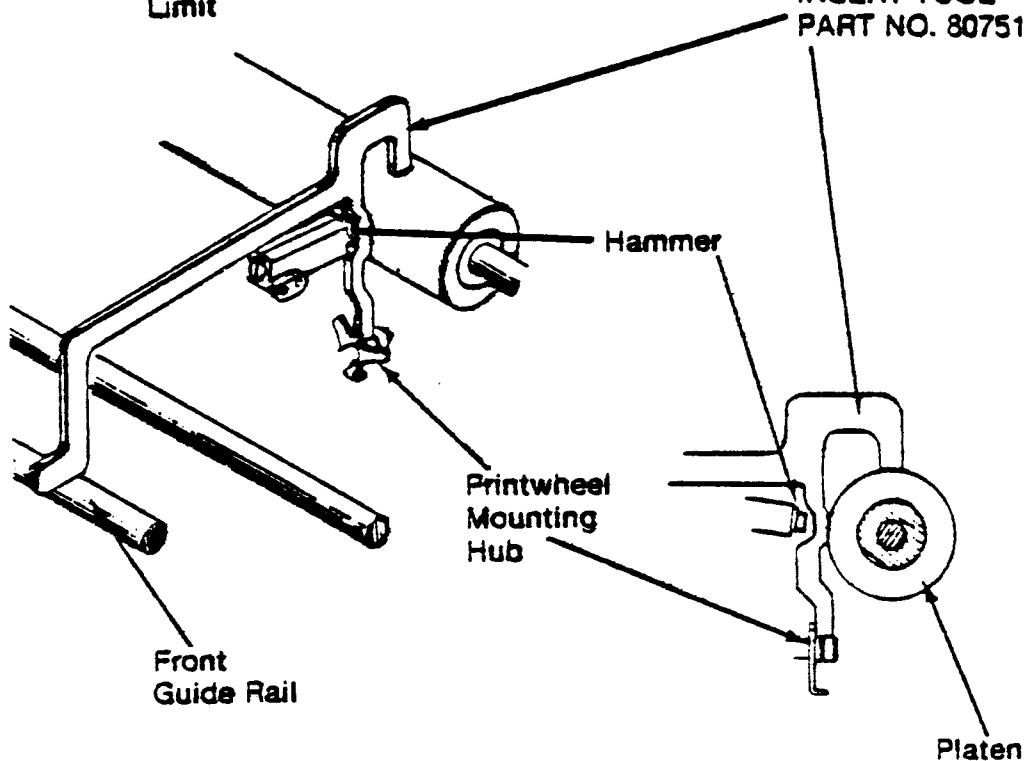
PLATEN DEPTH AND HEIGHT ADJUSTMENT, STEP 1
